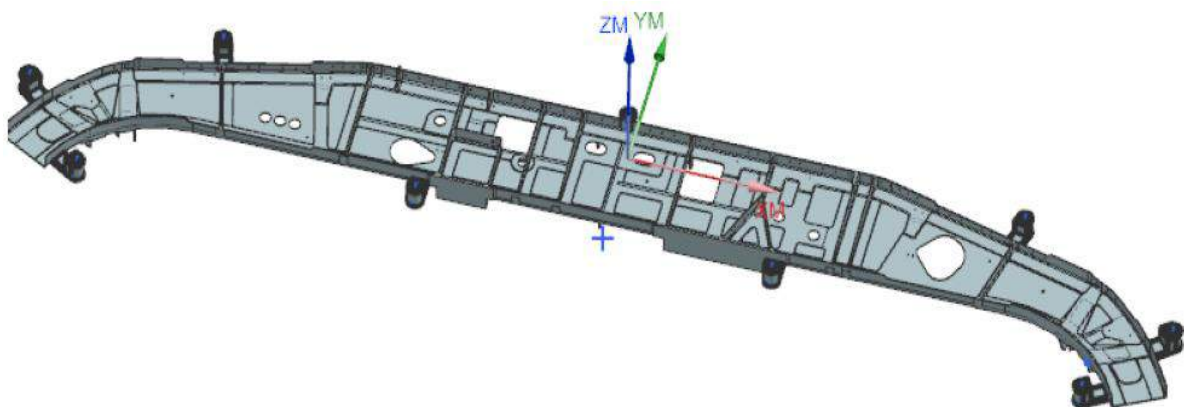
CAD model of the manufactured part – traditional fixture method.
